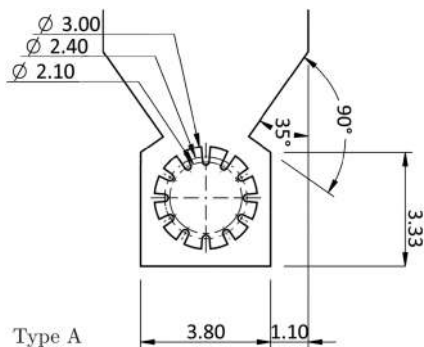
Details and dimensions (in millimeters) of the flat foil target frame design with serrated aperture in top view.
